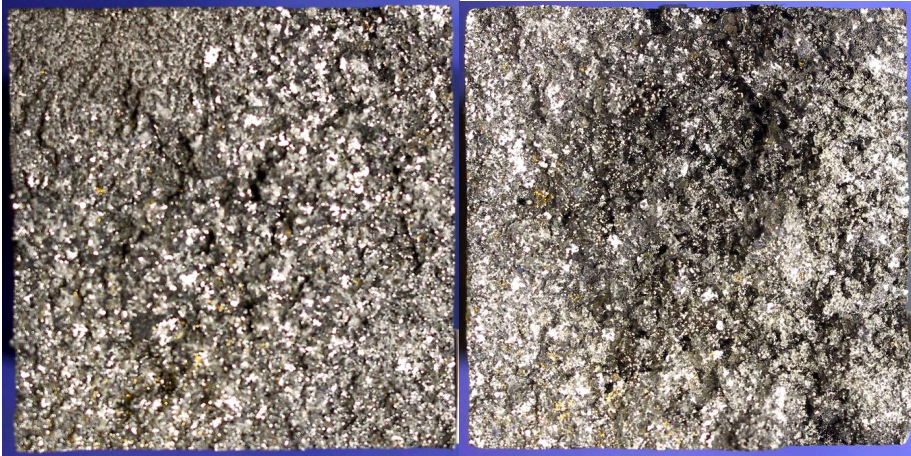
Fracture surfaces of basic material (specimen 6.2 on left) and a specimen with porosity (2.2 on right).
